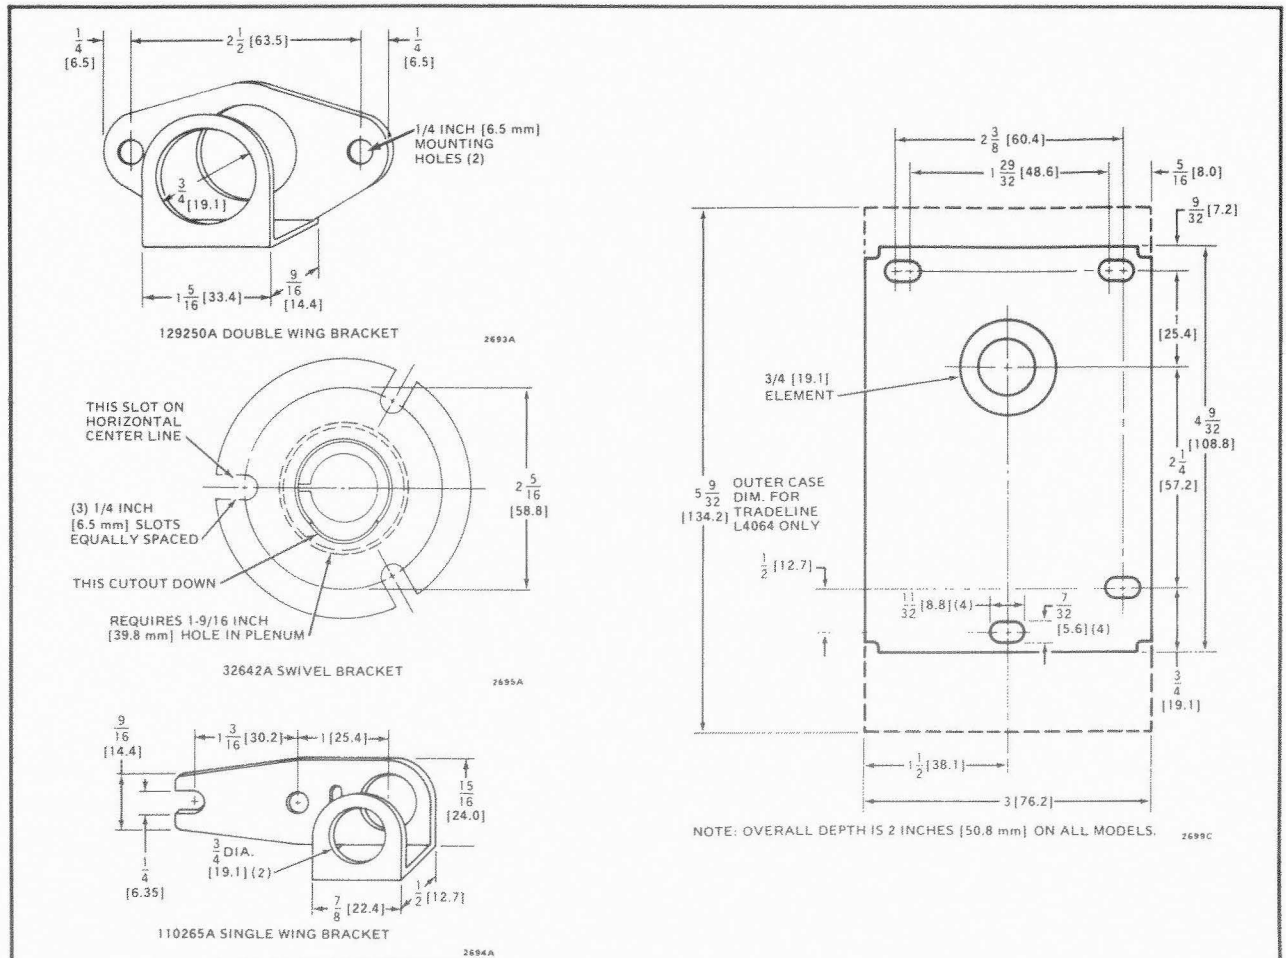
MOUNTING DIMENSIONS IN in. [mm IN BRACKETS].
